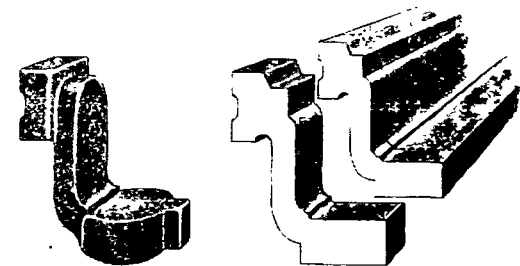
Small castings, forgings or parts machined from bar stock may permit redesign to an extruded shape, if their cross sections are symmetrical in one plane.
